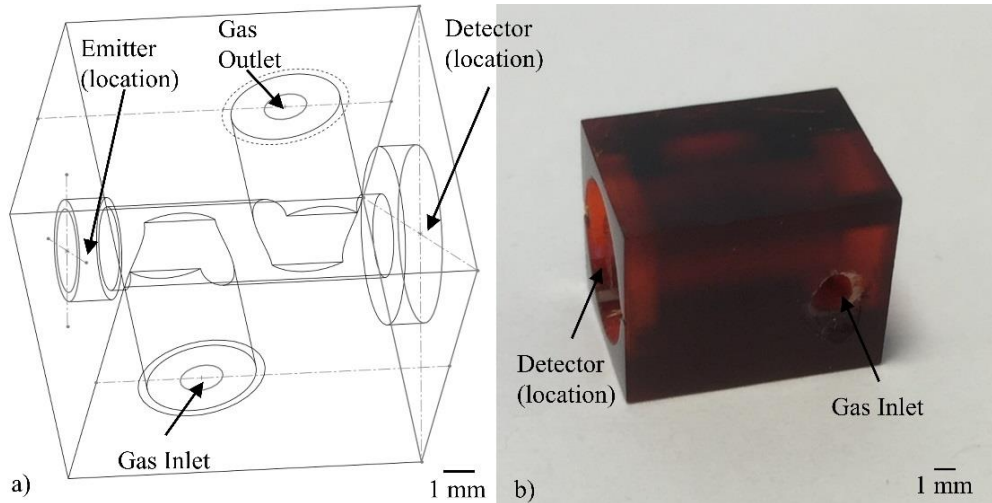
NDIR holder to fit inside POM chamber, a) Sketch in Solidworks; b) Photograph of 3D printed part.
